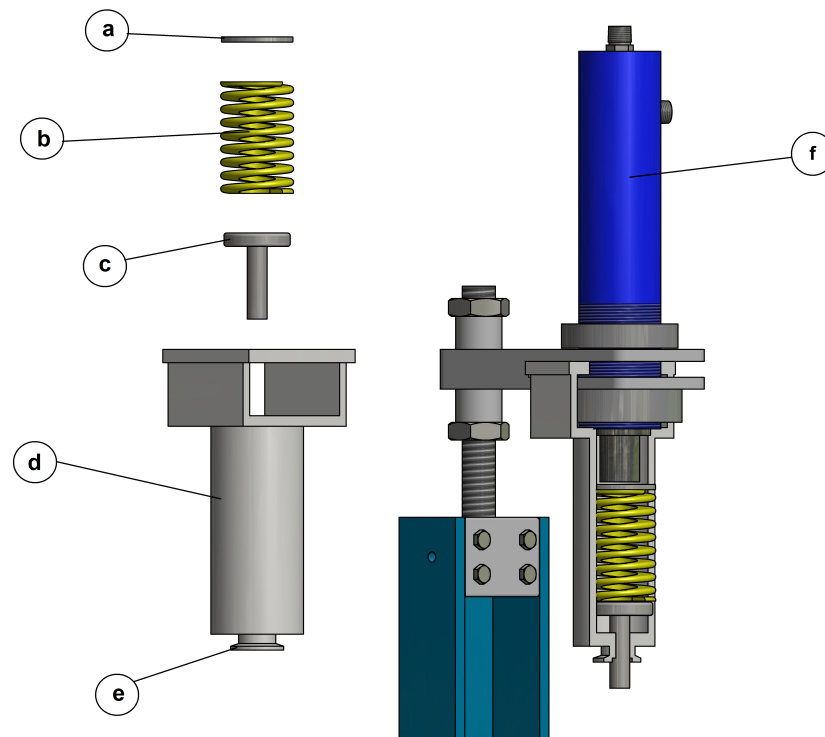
Stress module components. a) steel disk. b) Spring. c) Pusher. d) Spring enclosure. e) QF flange. f) Hydraulic cylinder.
